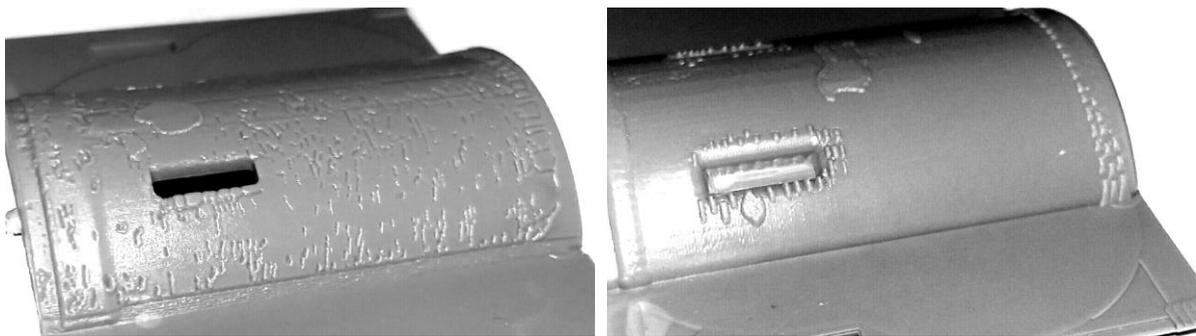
(a) Detail of North Wall Apse Injection Moulding ; (b) Detail of South Wall Apse;
